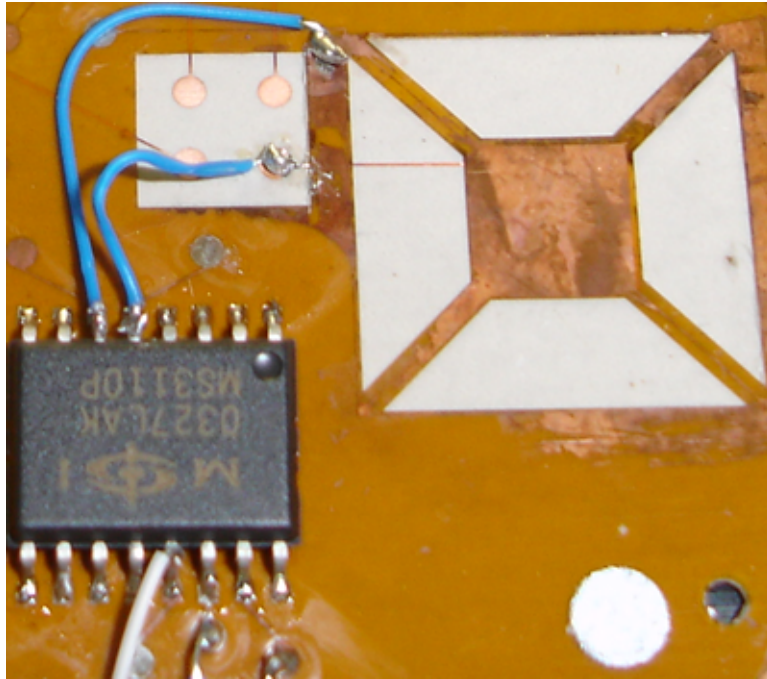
Photograph of the fabricated PCB MEMS Accelerometer integrated with capacitive readout chip. Courtesy AMSTC-Auburn University
